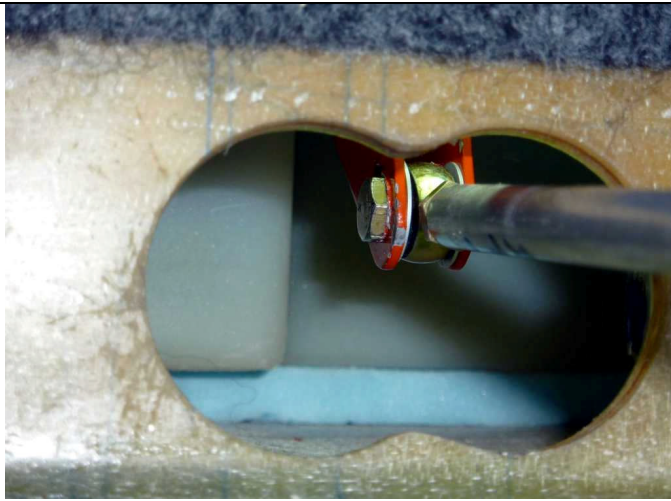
Example TruTrak installation. Viewed through access holes in thigh support.
